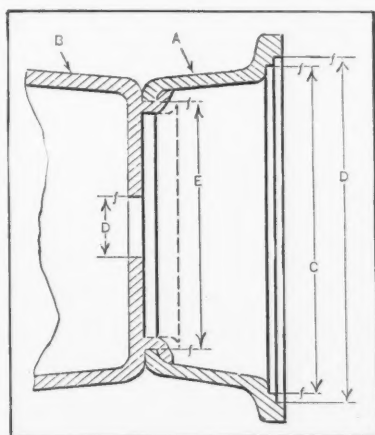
Parts Assembled by Device Shown in Fig. 2
